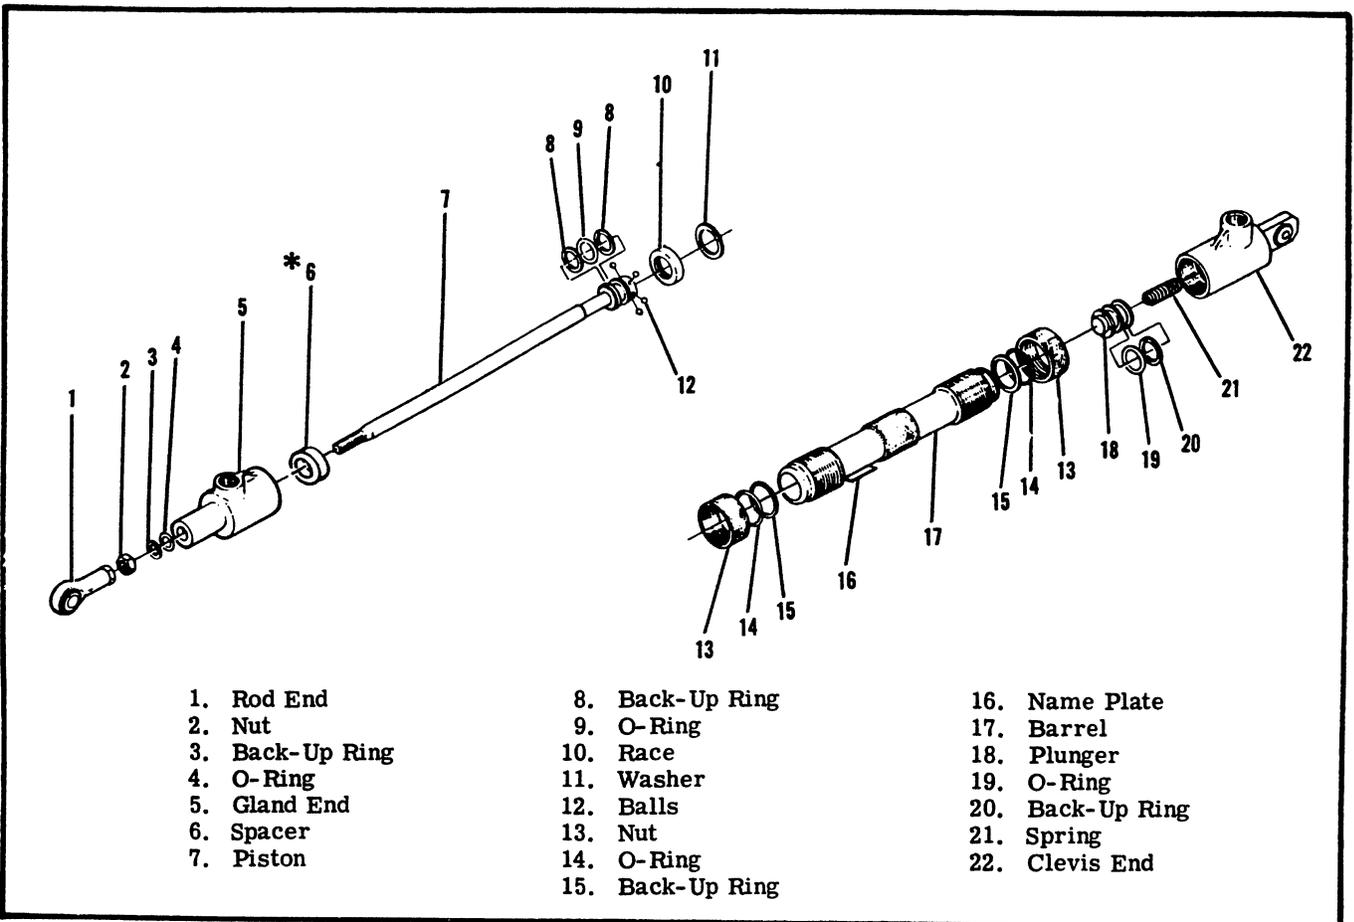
Landing Gear Door Actuator (Sheet 1 of 2)
